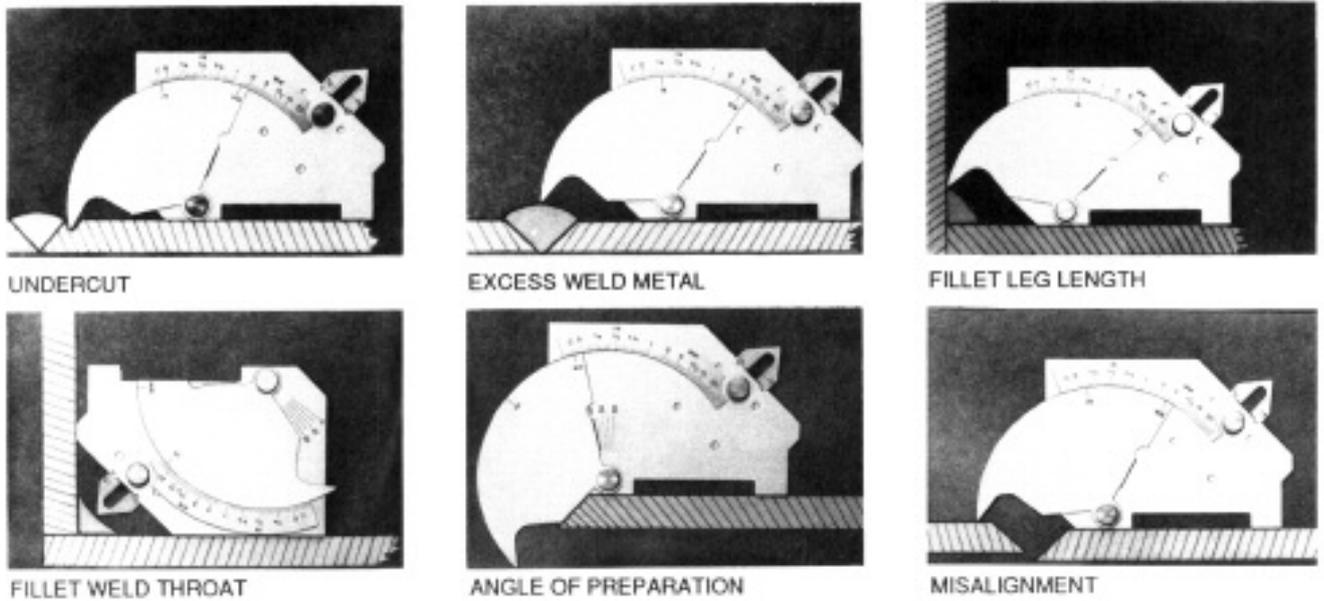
A bridge cam gauge can provide a variety of measurements.
